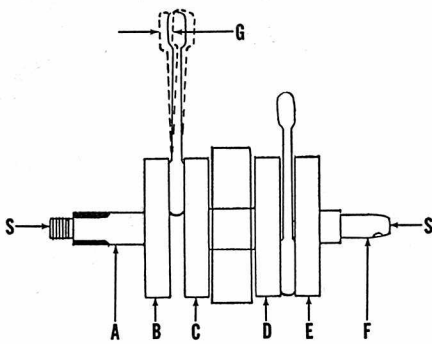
Refer to text to check crankshaft for correct assembly or wear.
